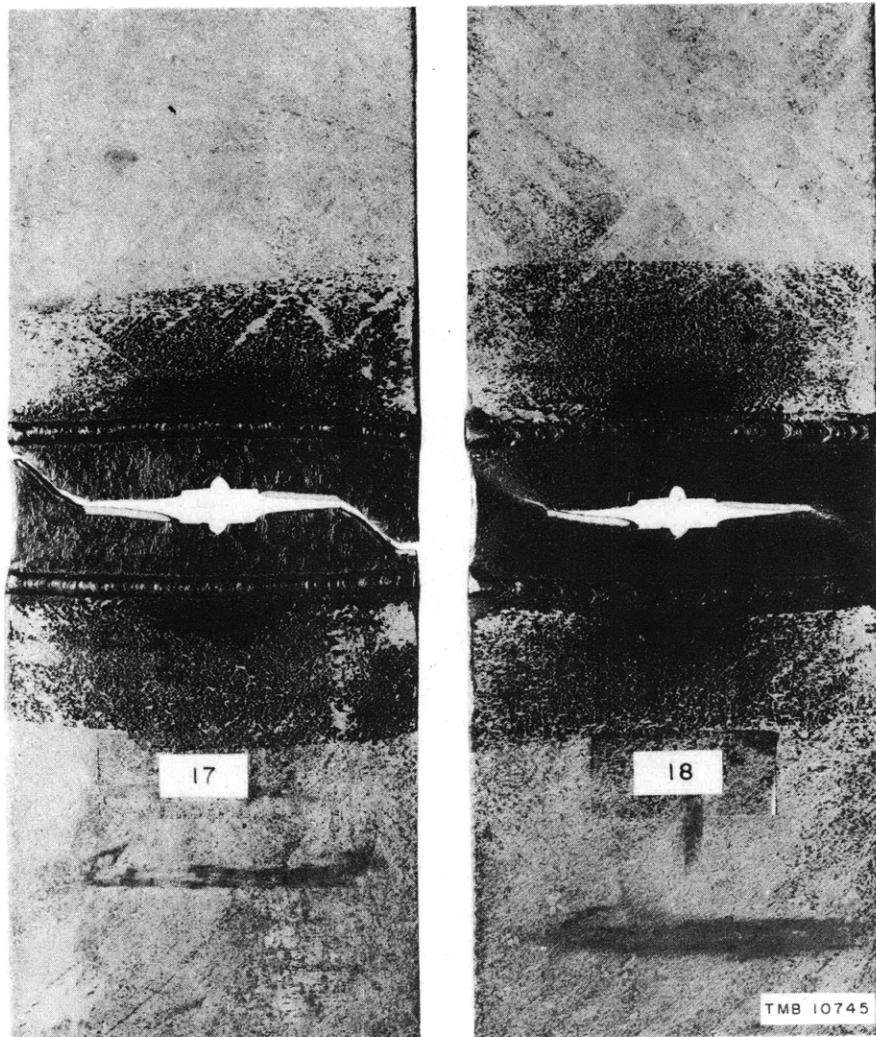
Specimens 17 and 18 with Prestressed Test Sections Welded in Place
